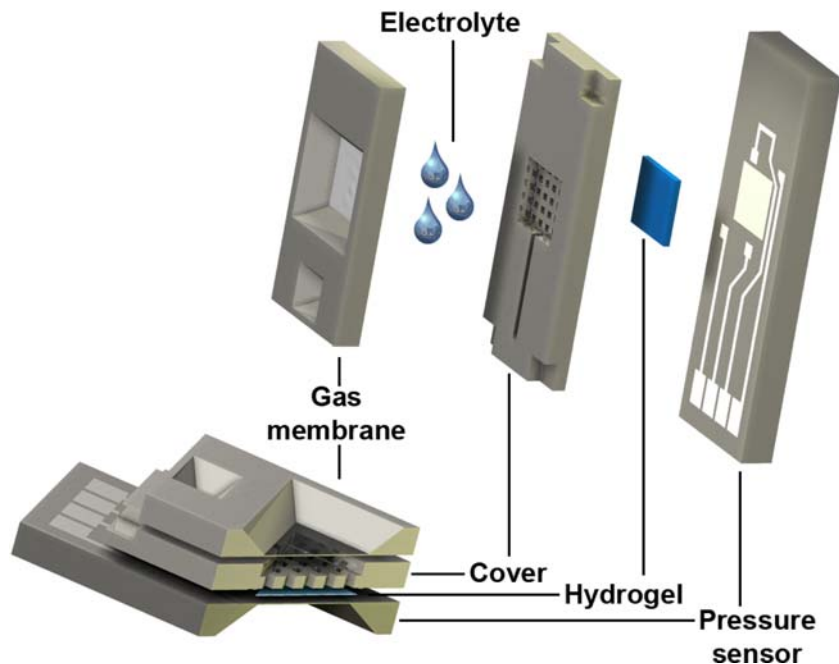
Exploded view of all parts and assembly drawing of the final hydrogel-based CO₂ sensor.
